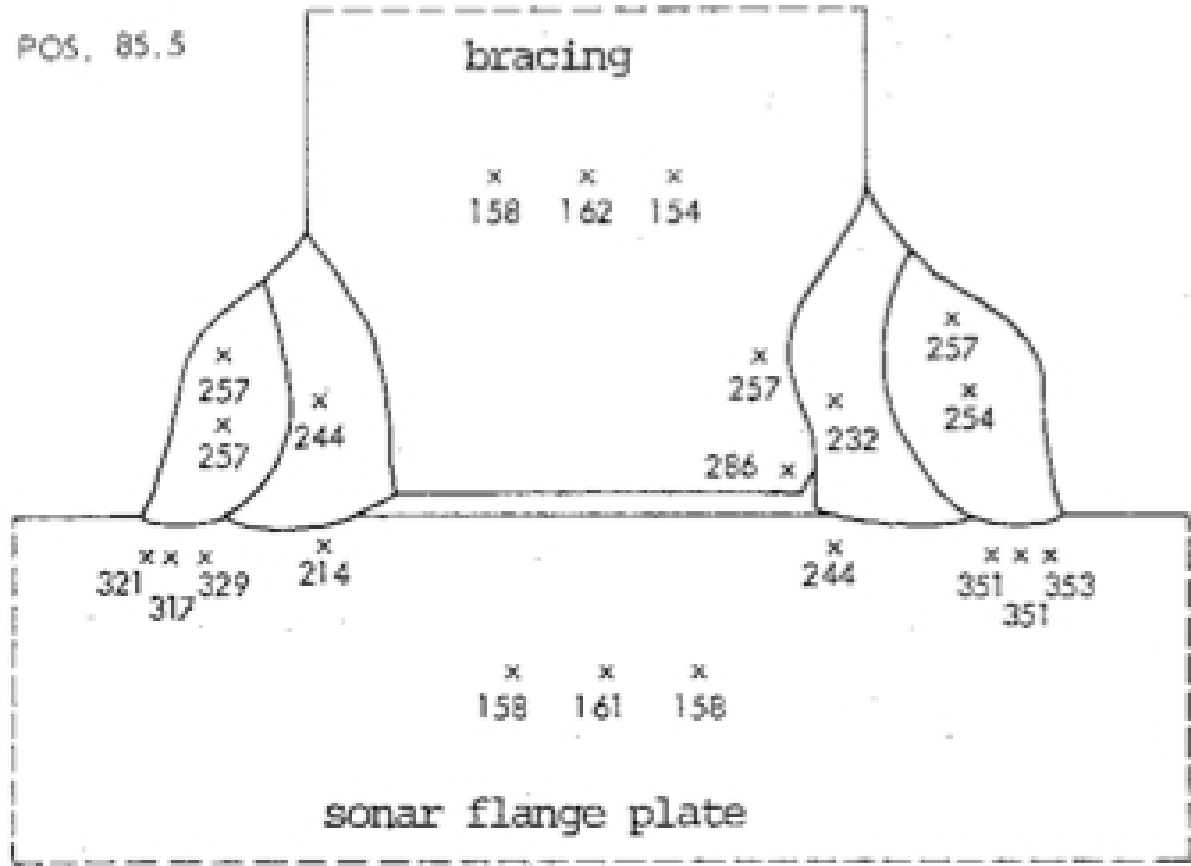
Hardness measurements (HV_s) in the vicinity of the fillet weld between the flange plate and main bracing (ref. 37)
